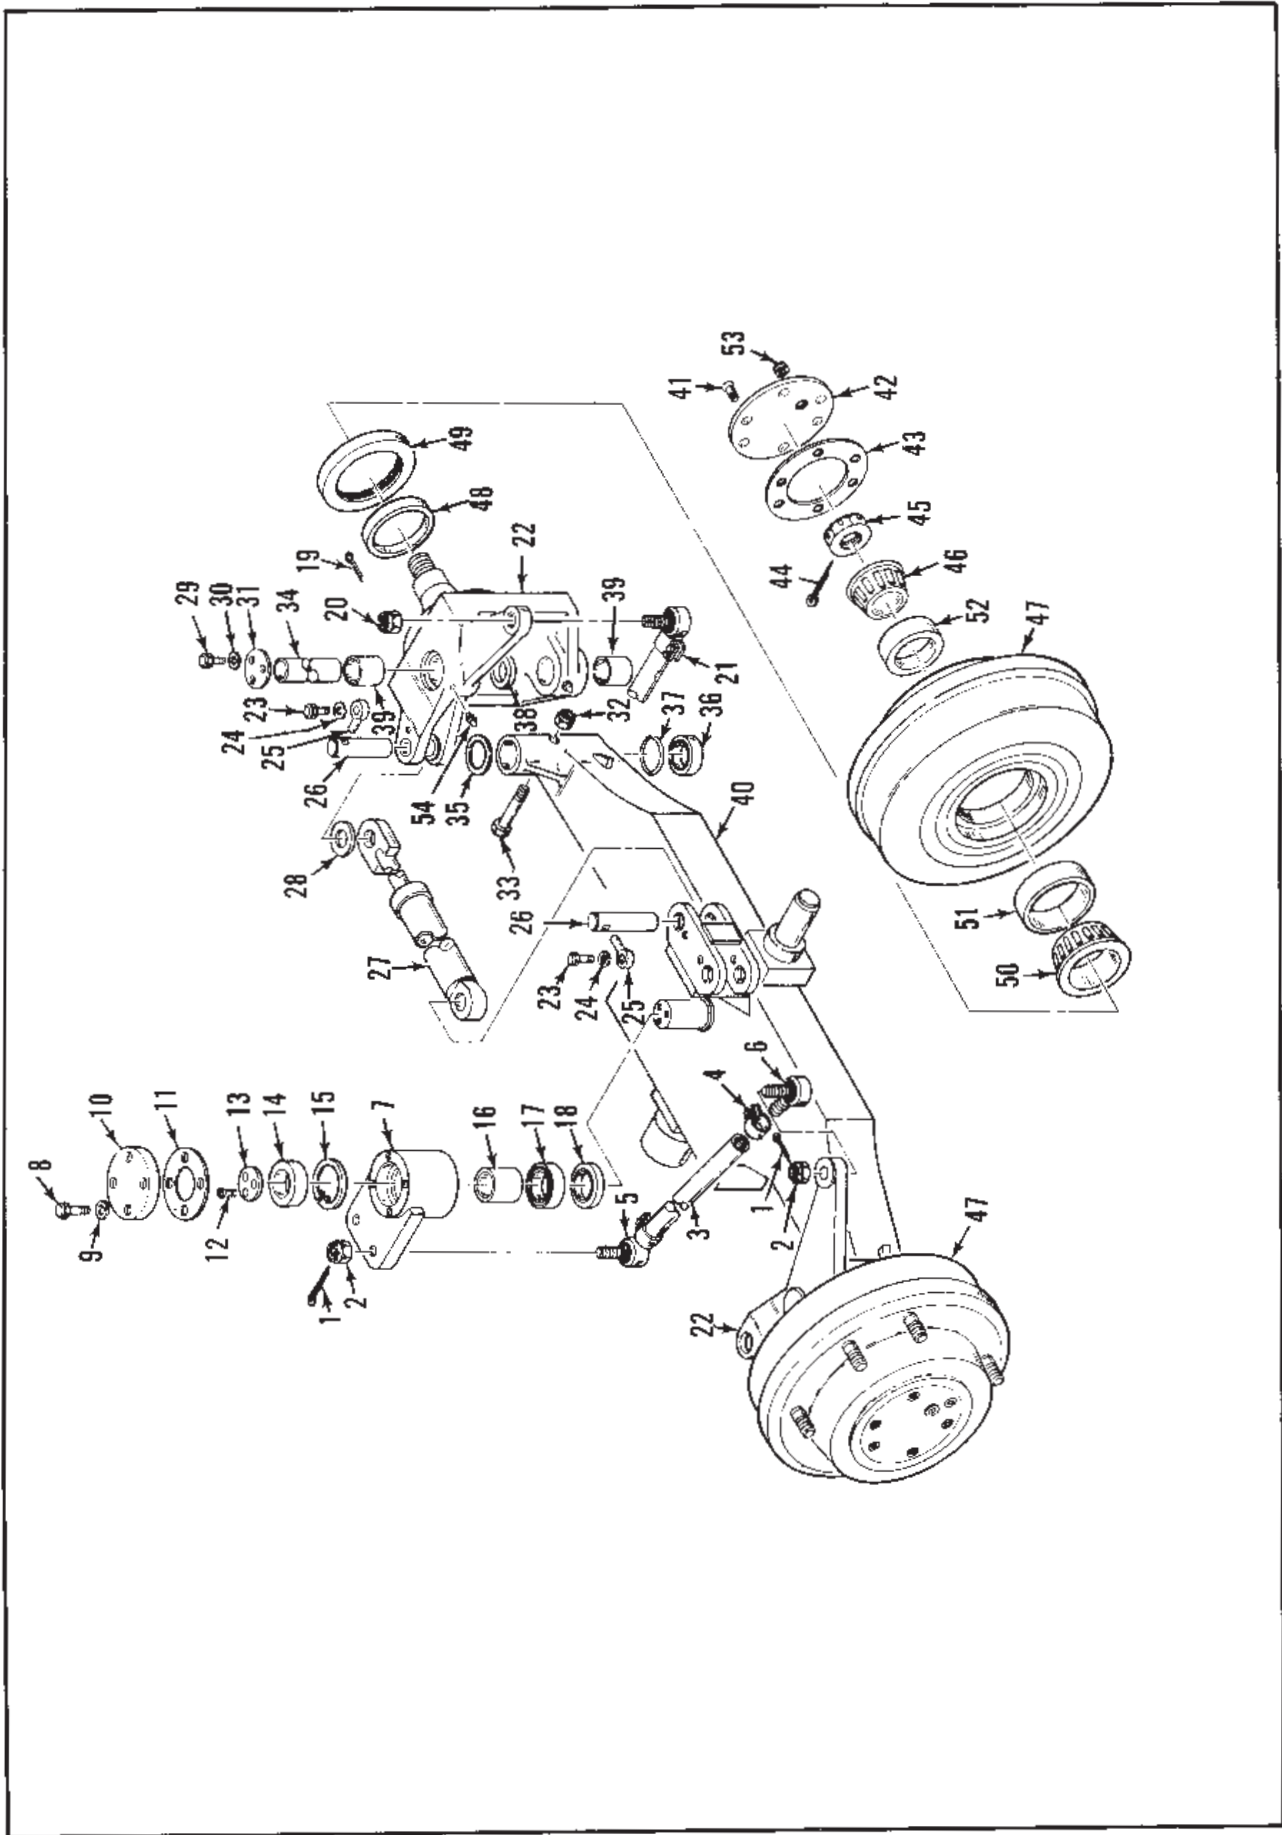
Steer Axle, Exploded View (View 1 of 2)
